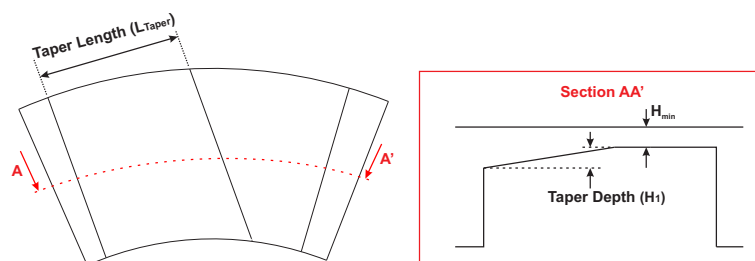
Tapered-land bearing configuration sketch.
